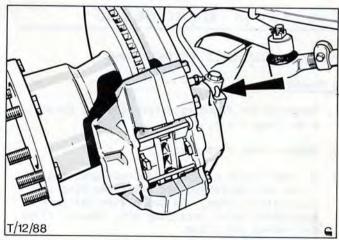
Reconnect hydraulic fluid pipes to caliper ensuring guide pin is located correctly in caliper.
